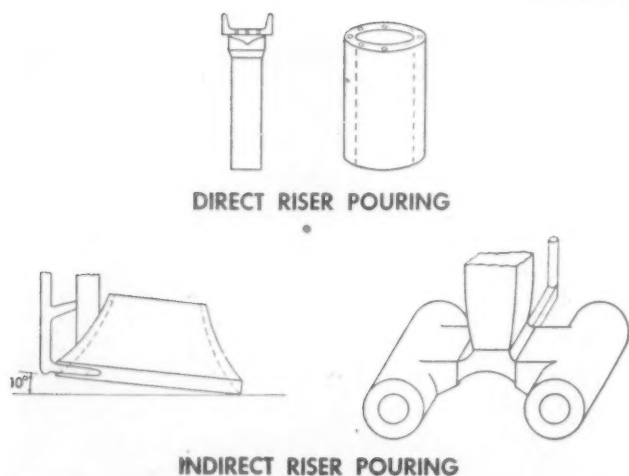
EXAMPLES OF GATING TO PROVIDE THE HOTTEST METAL IN THE BEST POSITION FOR FEEDING.
